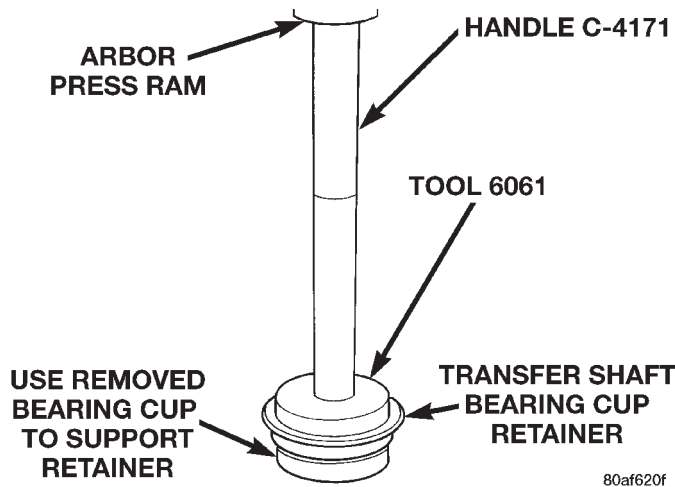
Install Transfer Shaft Bearing Cup Into Retainer
